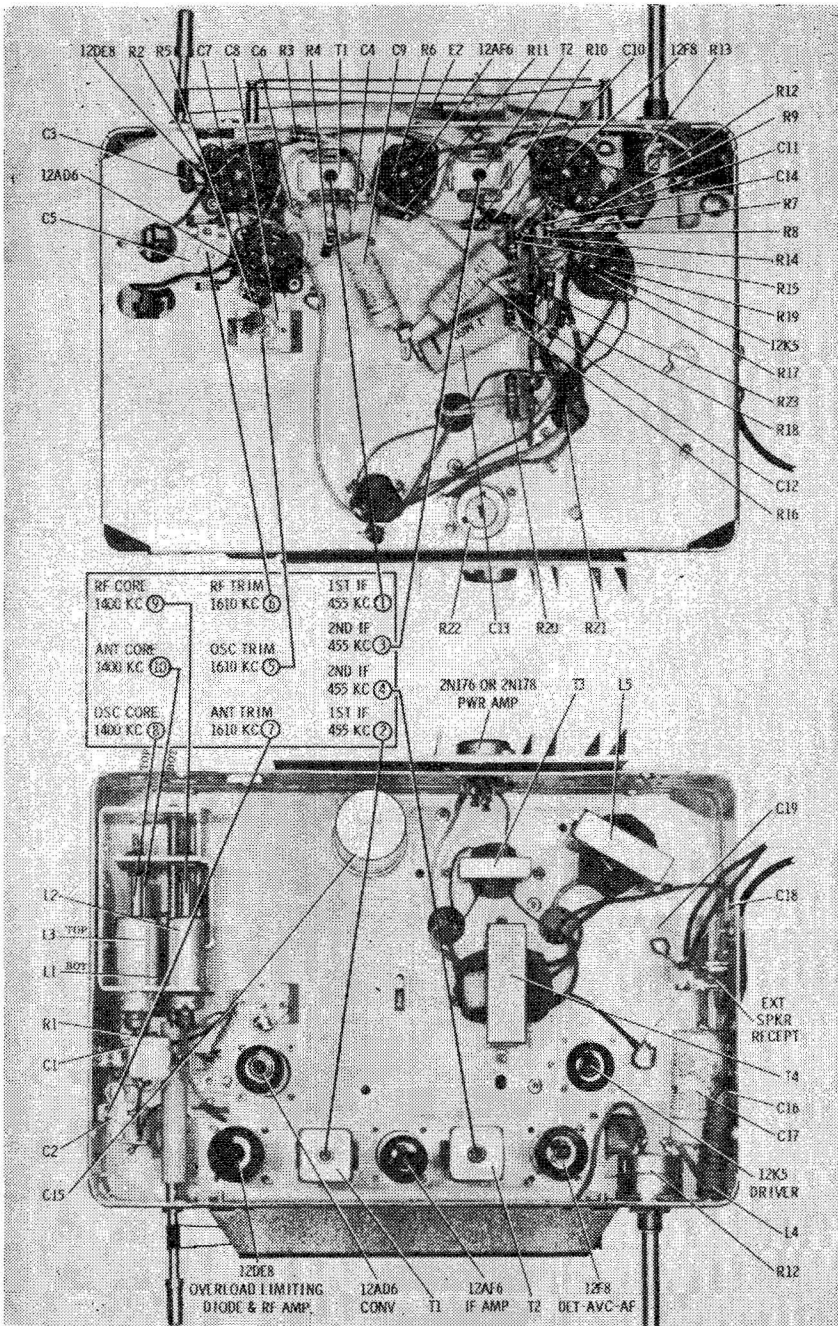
Above and below chassis views of the Model 397X receiver, showing the location of major components and identifying alignment adjustments.
